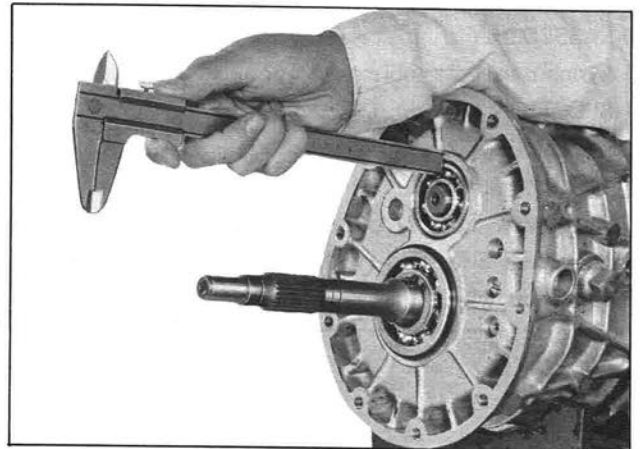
Selection main drive bearing spacer (Measuring depth "B")
